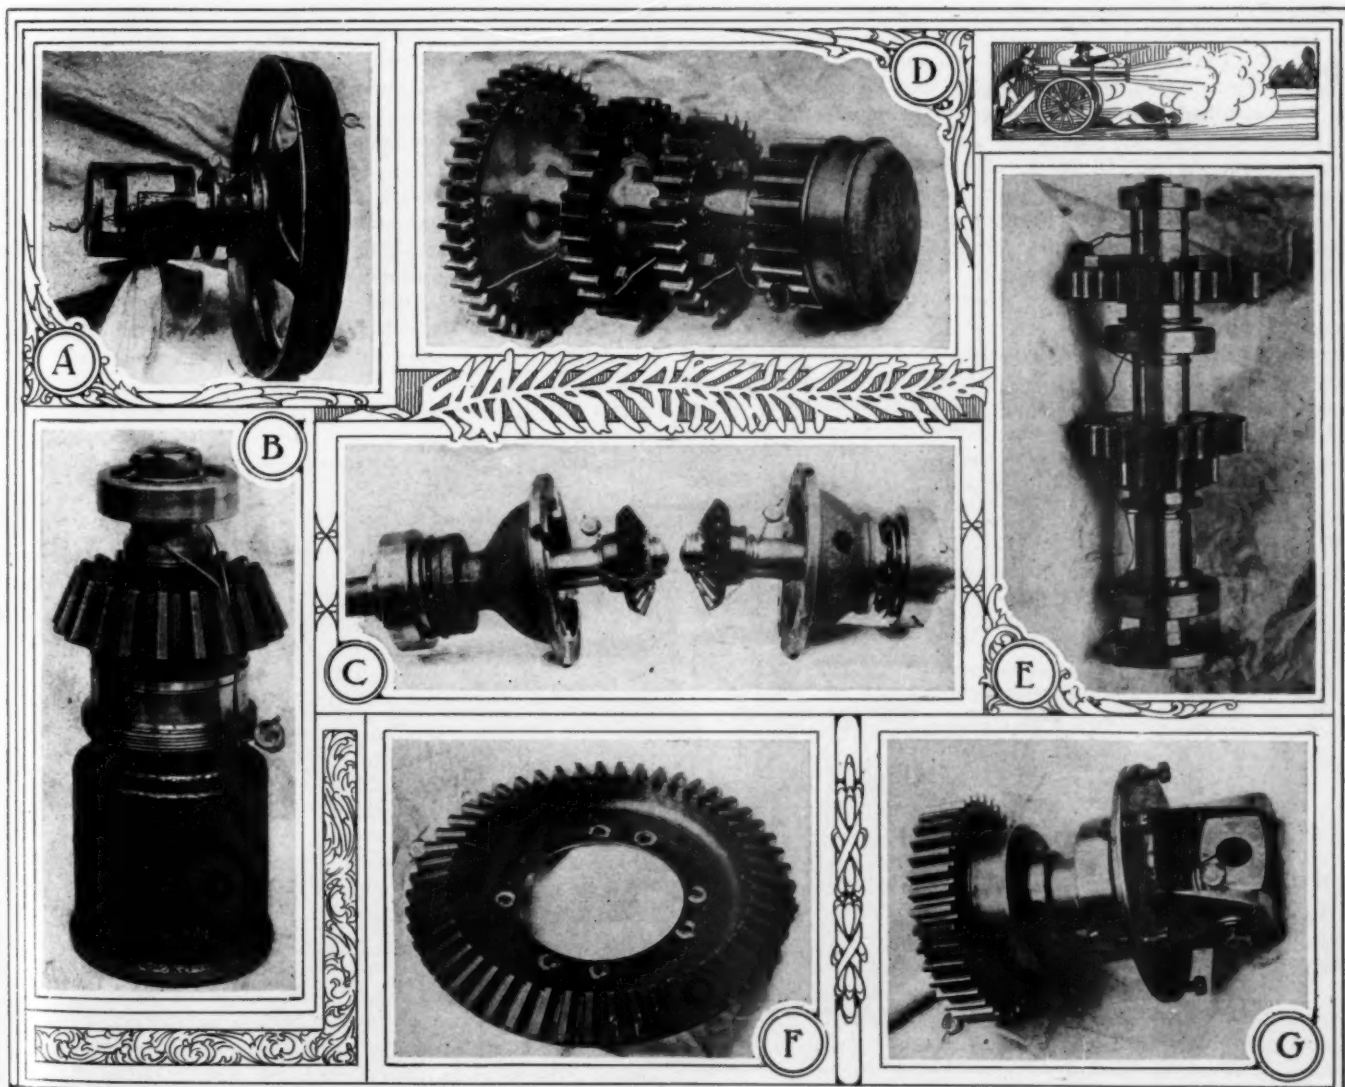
Transmission gears, bevel gear system, differential set, universal joints and clutch, as taken from a Hotchkiss car, by the R.A.C. Committee after an endurance run, showing the seals in place
